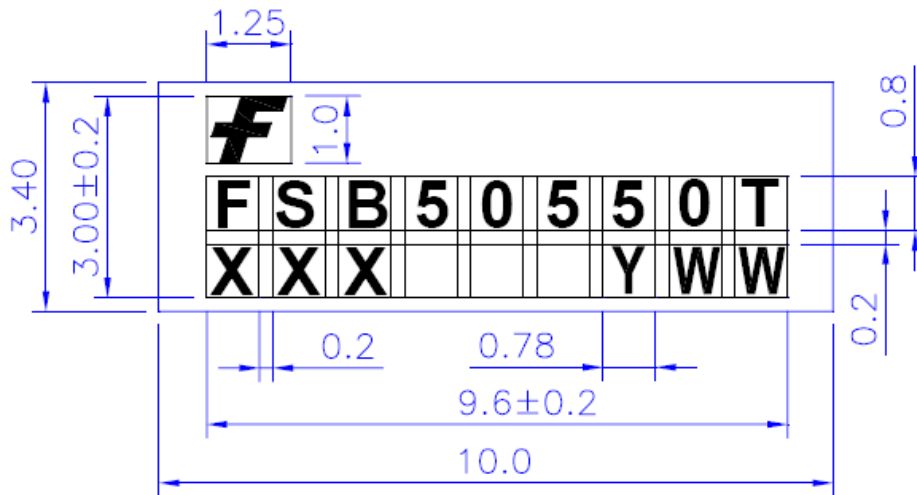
Marking dimension of Package SPM23-AC type.
